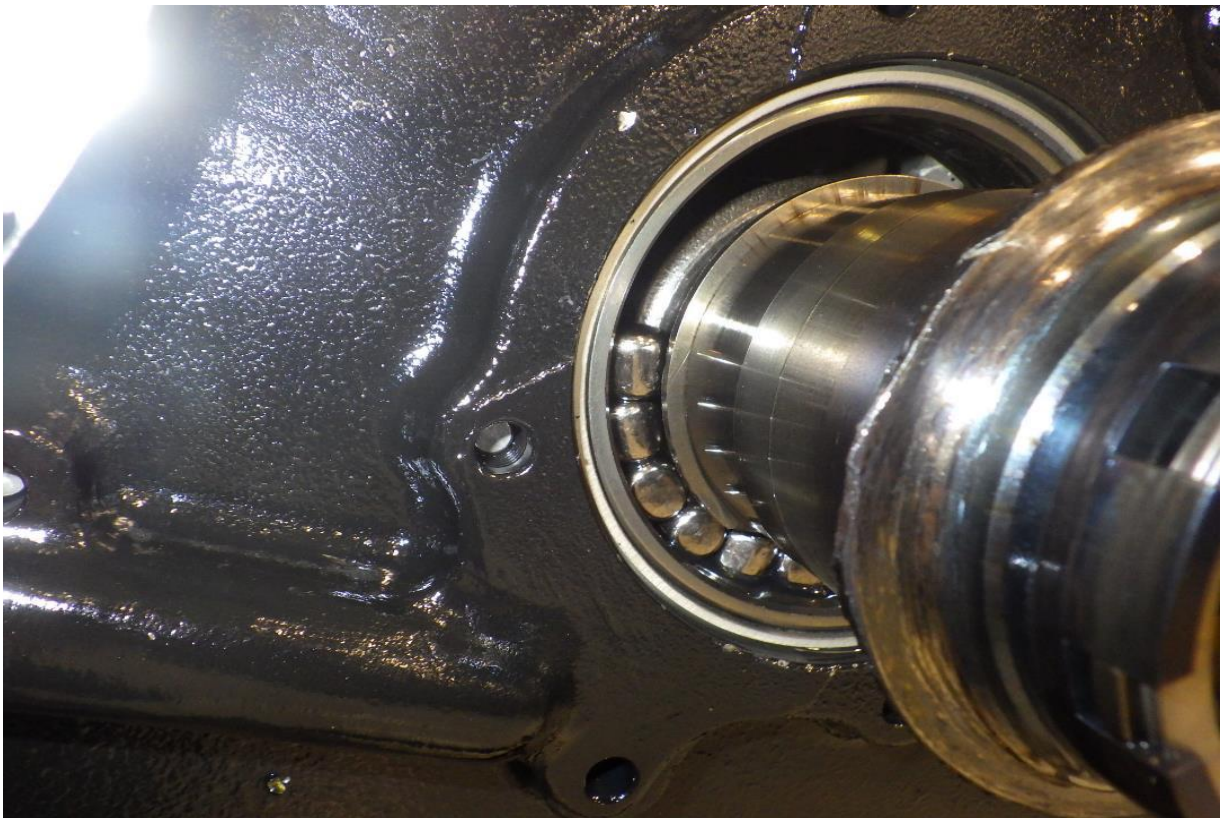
View of the no. 8 roller bearing. The fractured flange of the diaphragm coupling can be seen in the foreground [source: P&WC].
